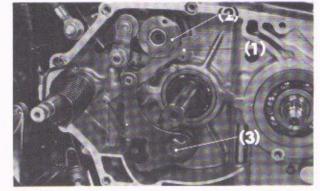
(1) Gear shift arm (2) Gear shift drum (3) Gear shift spindle
